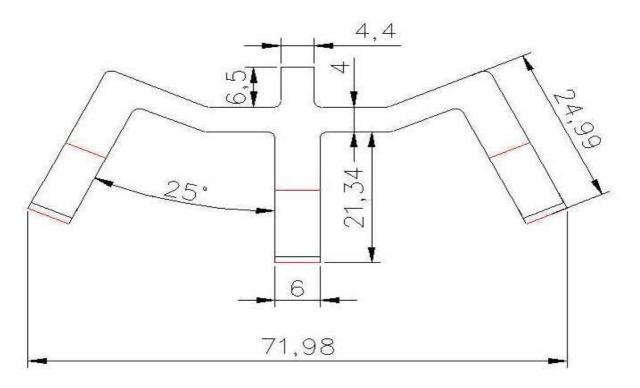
Engineering dimension drawing for 40314 (unit:mm)
